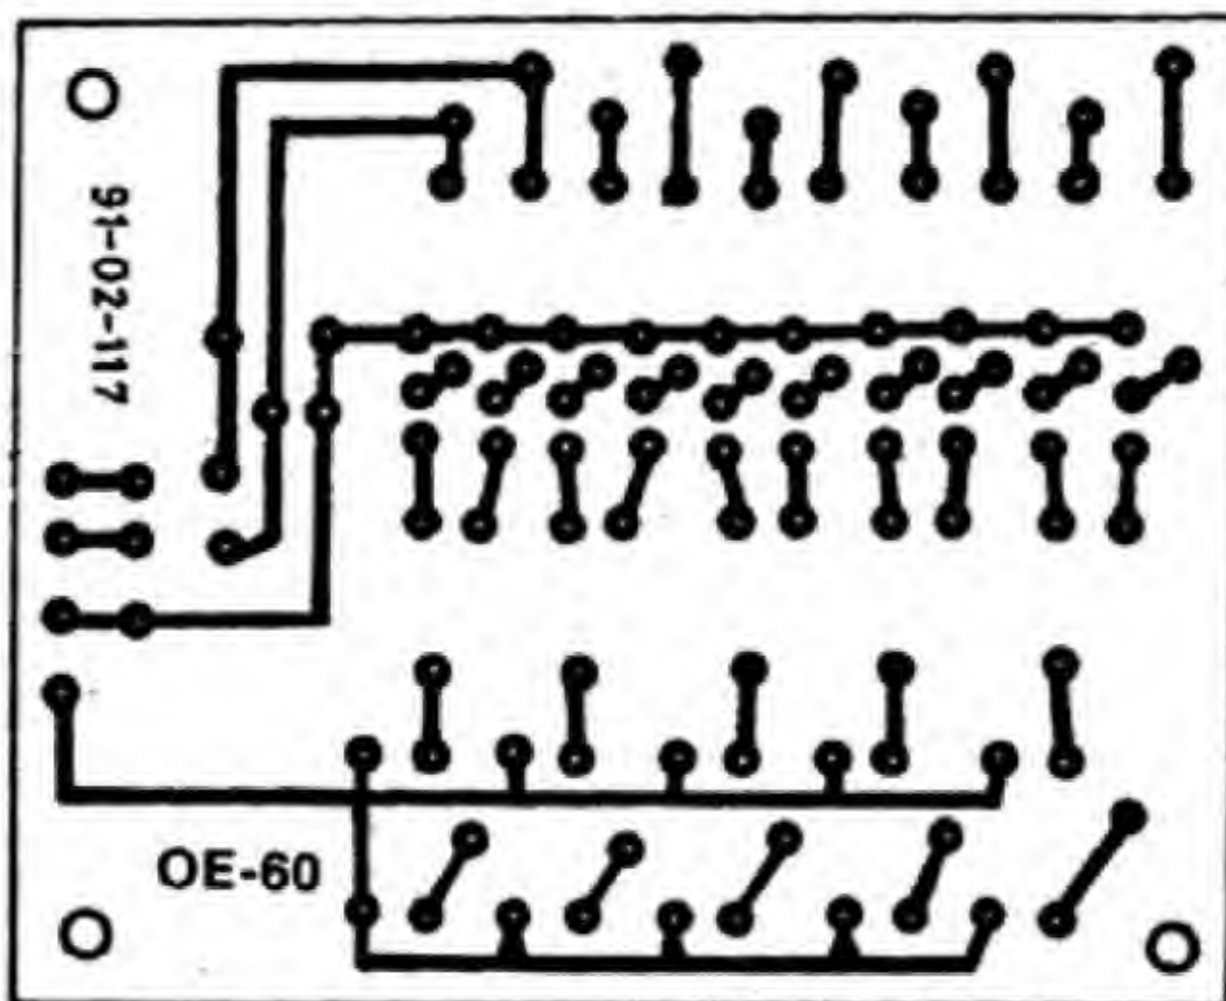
Actual-size PCB layout for the record level indicator (display).
